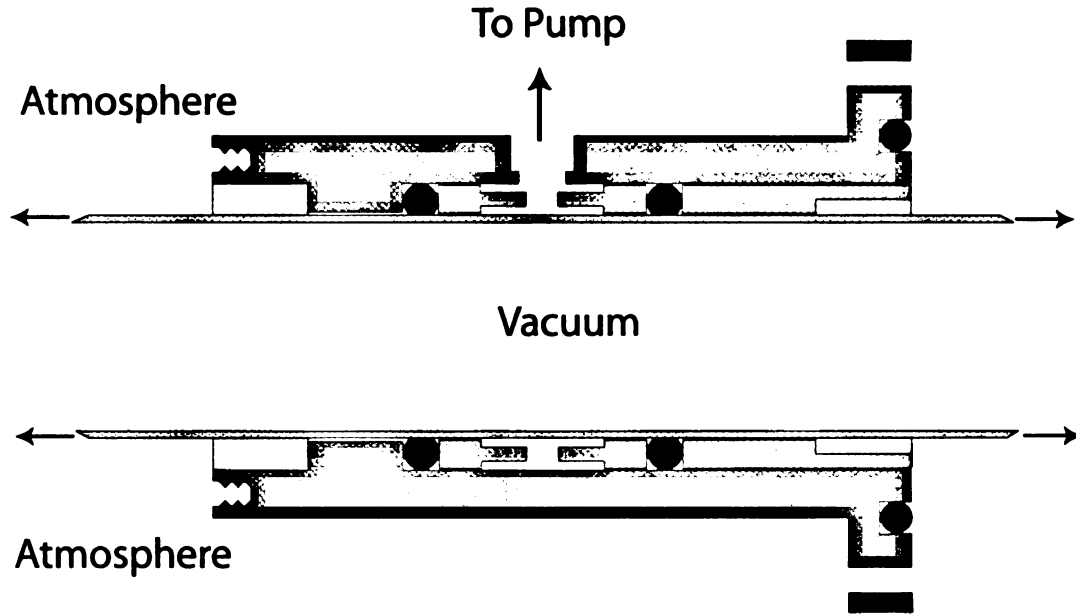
Load-lock sliding seal. Two O-rings define a volume which isolates the vacuum inside the probe from atmosphere. Any leak into this volume during the loading and unloading process is removed by a vacuum pump.
